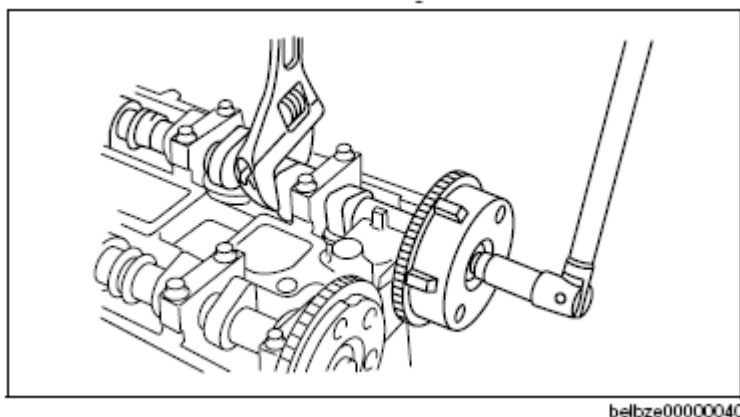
Loosening Camshaft Sprocket Installation Bolt Or Variable Valve Timing Actuator Installation Bolt
